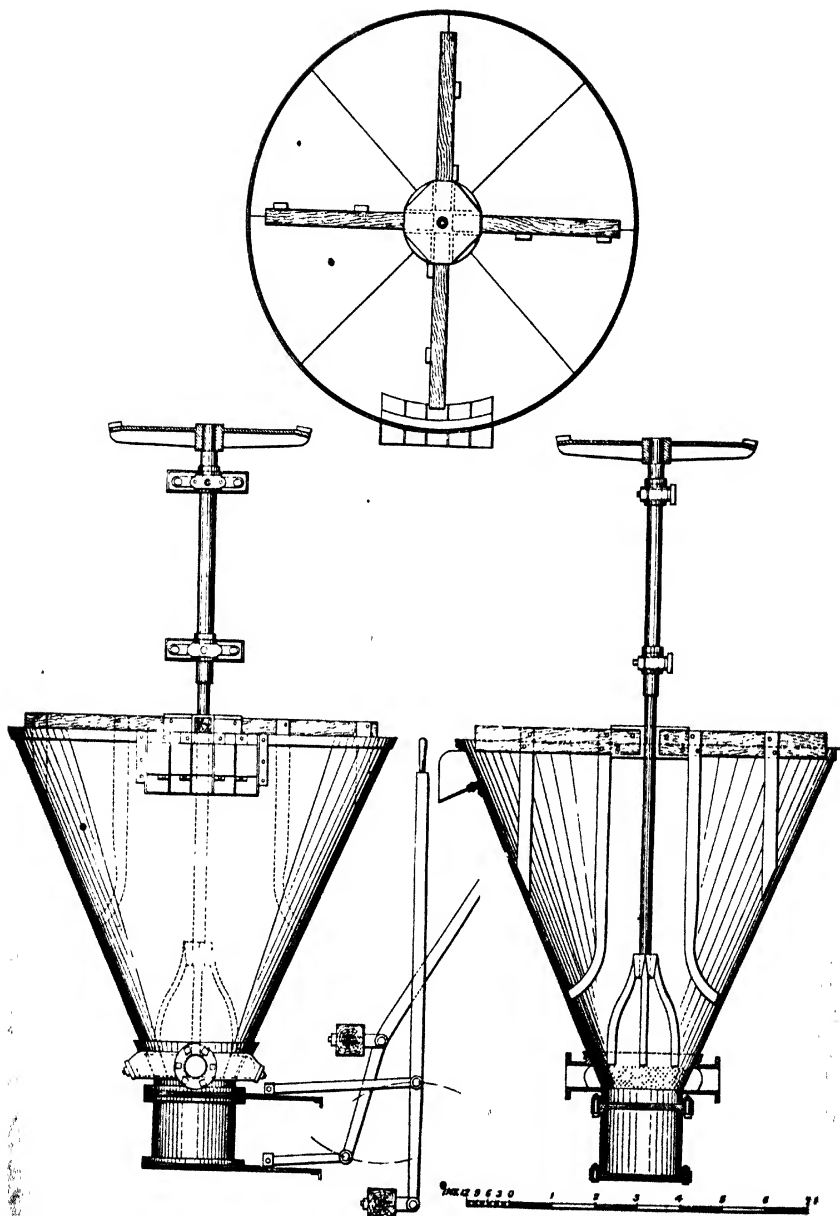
Robinson coal washer. Elevation, vertical section, and plan.
